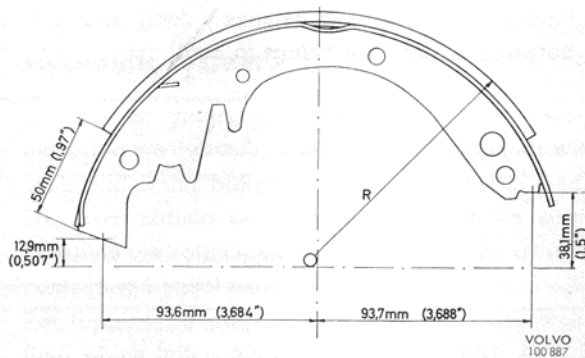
Adjustment dimensions for the rear brake shoes of the front wheels
